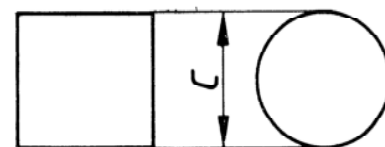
Optional spindle hole – Types in flange No. 2 (see 4.2)
